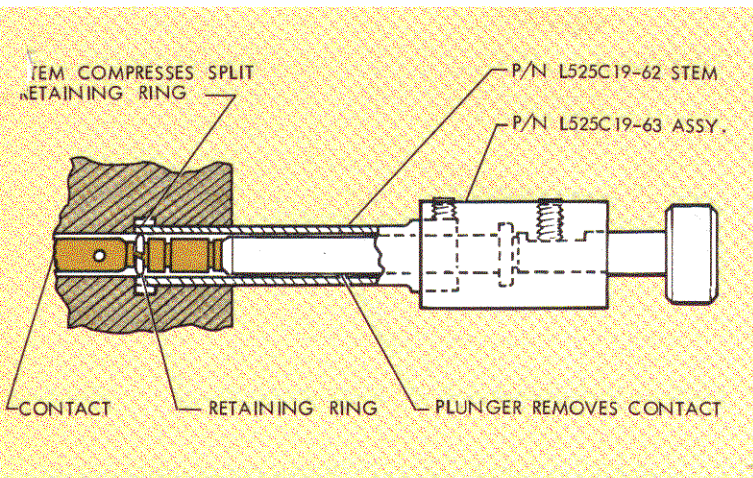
Operation of the L525C19-62 and -63 Viking Contact Removal Tool Assembly
